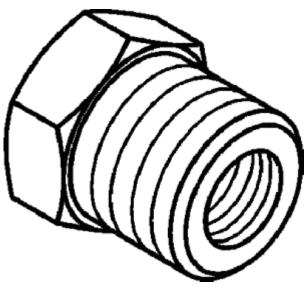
Adapter 8406 Courtesy of CHRYSLER LLC
